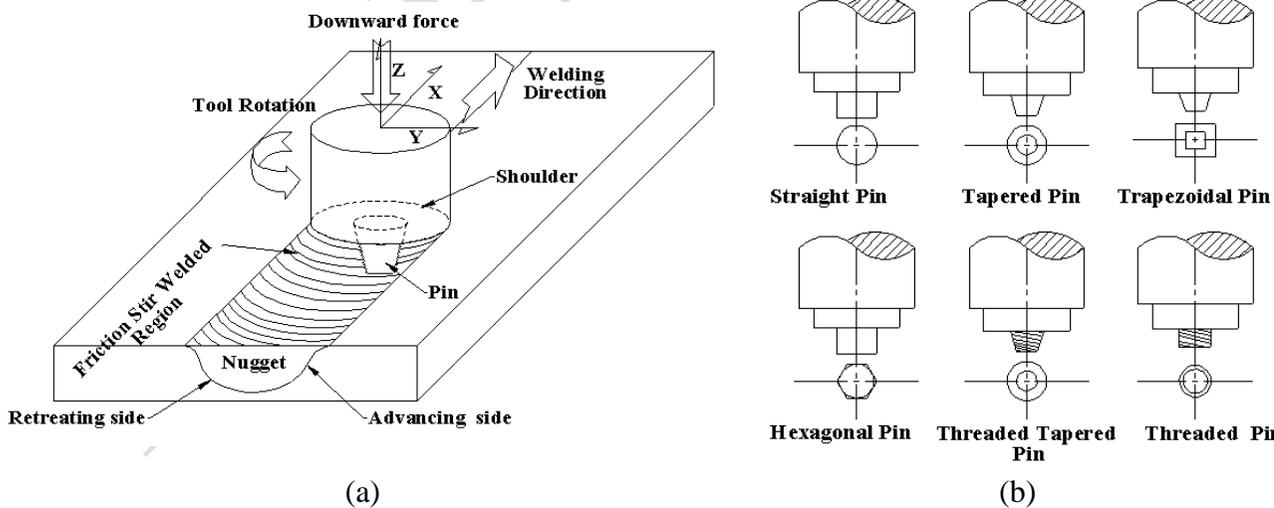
The friction stir welding occurred in (a) friction stir welding process. (b) Schematic drawing of the FSW tool geometries [11]
